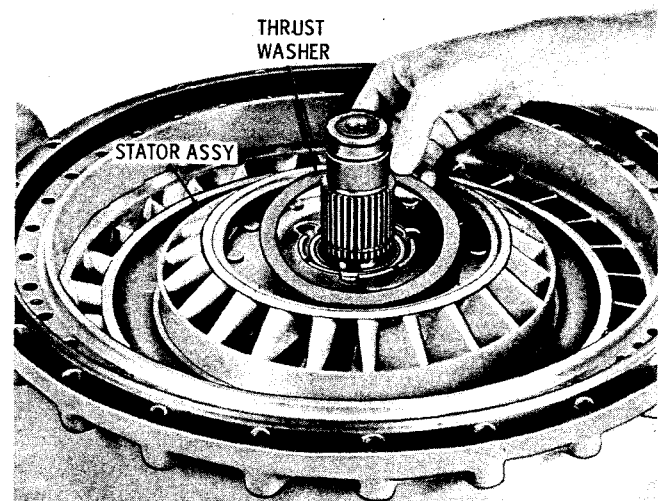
Removing thrust washer from single-stator assembly (fixed-capacity converter)
